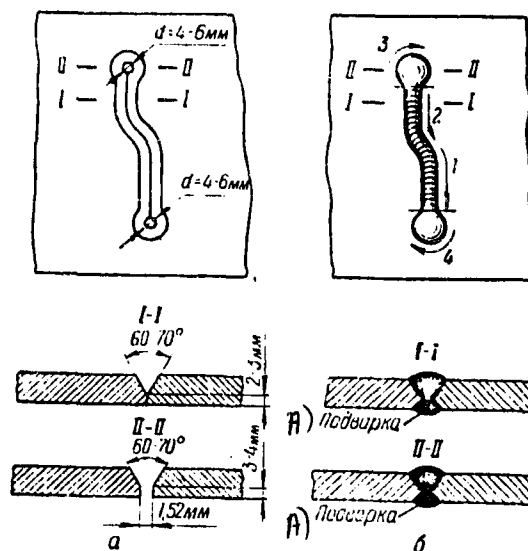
Diagram Showing the Dressing and Welding in of a Through Crack: a- dressing; b- welding in; Arabic numbers and arrows indicate the sequence and direction of building up the seams. Key: A) Final (back) welding.
